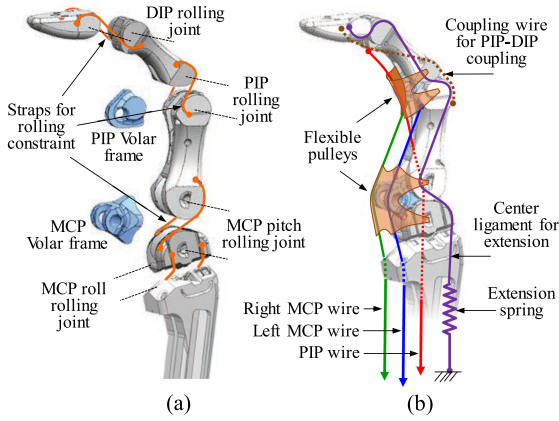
Mechanical design of the FLLEX finger. (a) Rigid frames and the coupling wires. (b) Actuation wires and flexible pulleys.
